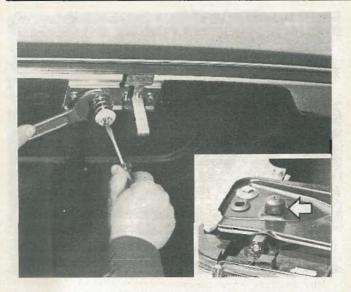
Adjusting the length of the bonnet lock striker. Inset shows rubber buffer on front crossmember (Sec 8)
